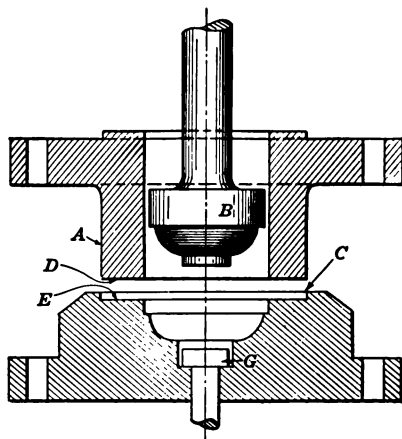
Double action cutting and drawing die: "Closed bottom" type
